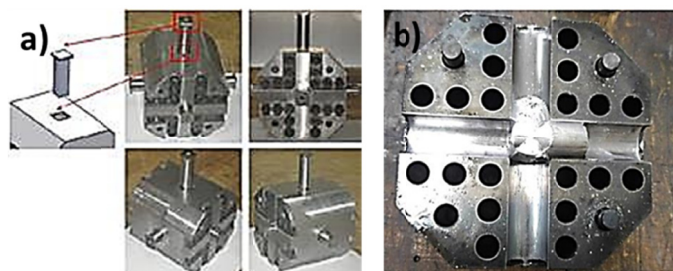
a) Hexa die used in the ECAP process [12], b) Workpiece after Hexa-ECAP process
